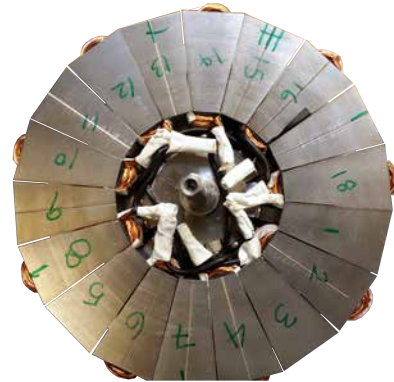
The completed stator assembly of the ferrite magnet motor.
